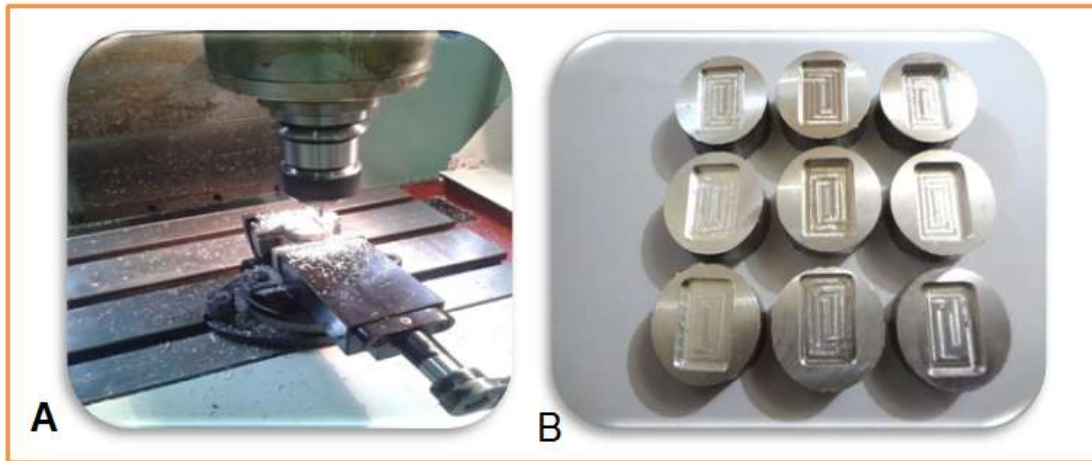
(a) Experimental work applied in university of technology (b) nine-actual workpiece machined at proposal work.
